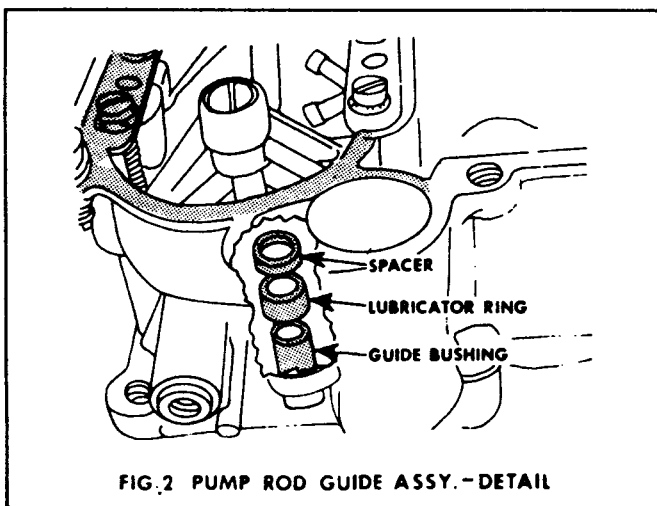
PUMP ROD GUIDE ASSY.—DETAIL
